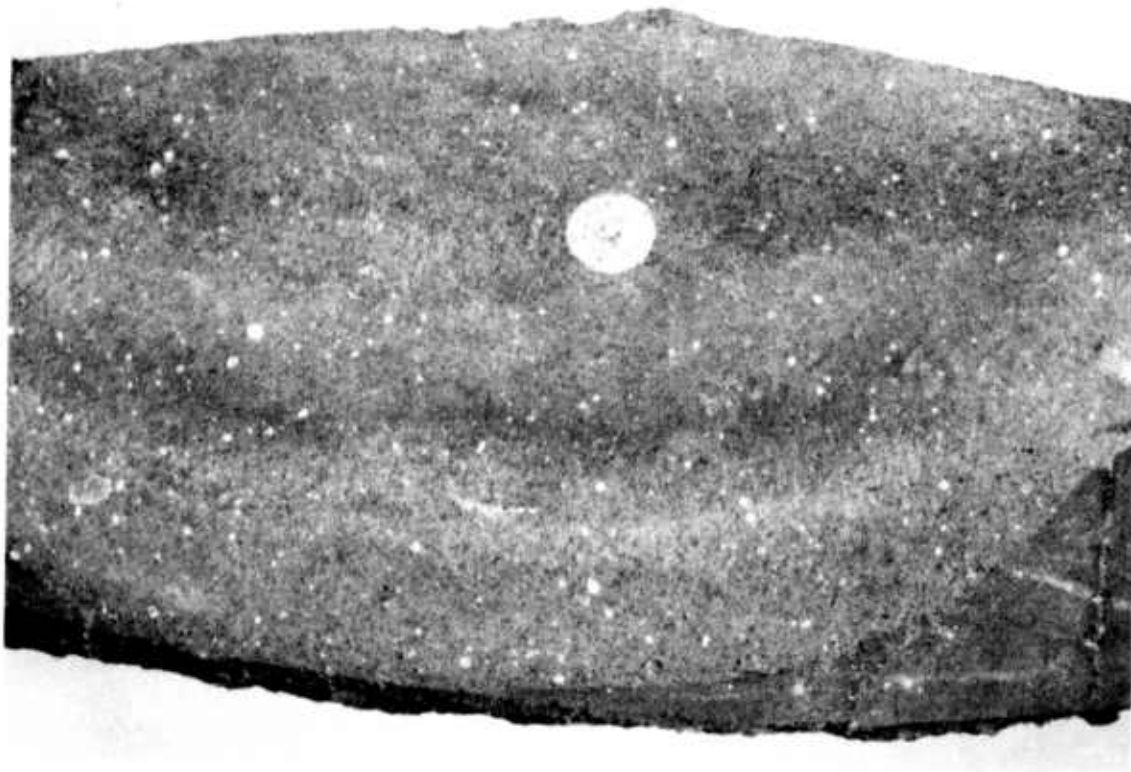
Fracture Surface of Rotor Ring Showing Typical Flaw Caused by Entrapped Gas During Molding
